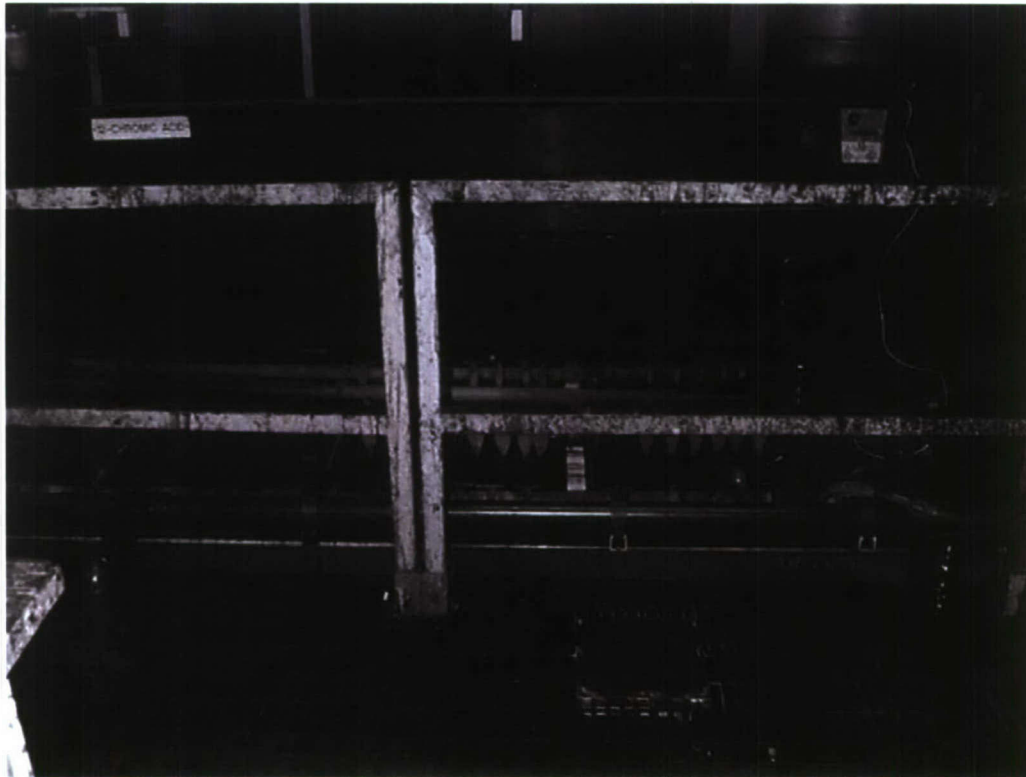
Overall view from the side of tank 12-a pre-4-in. PRD plating start.
